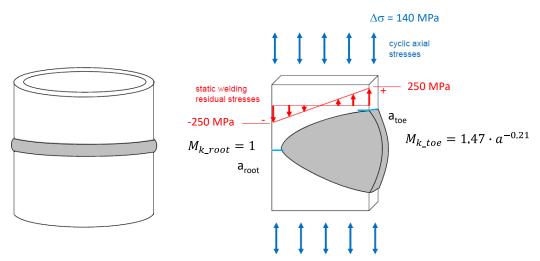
Butt welded pipe connection with 10 mm wall thickness
